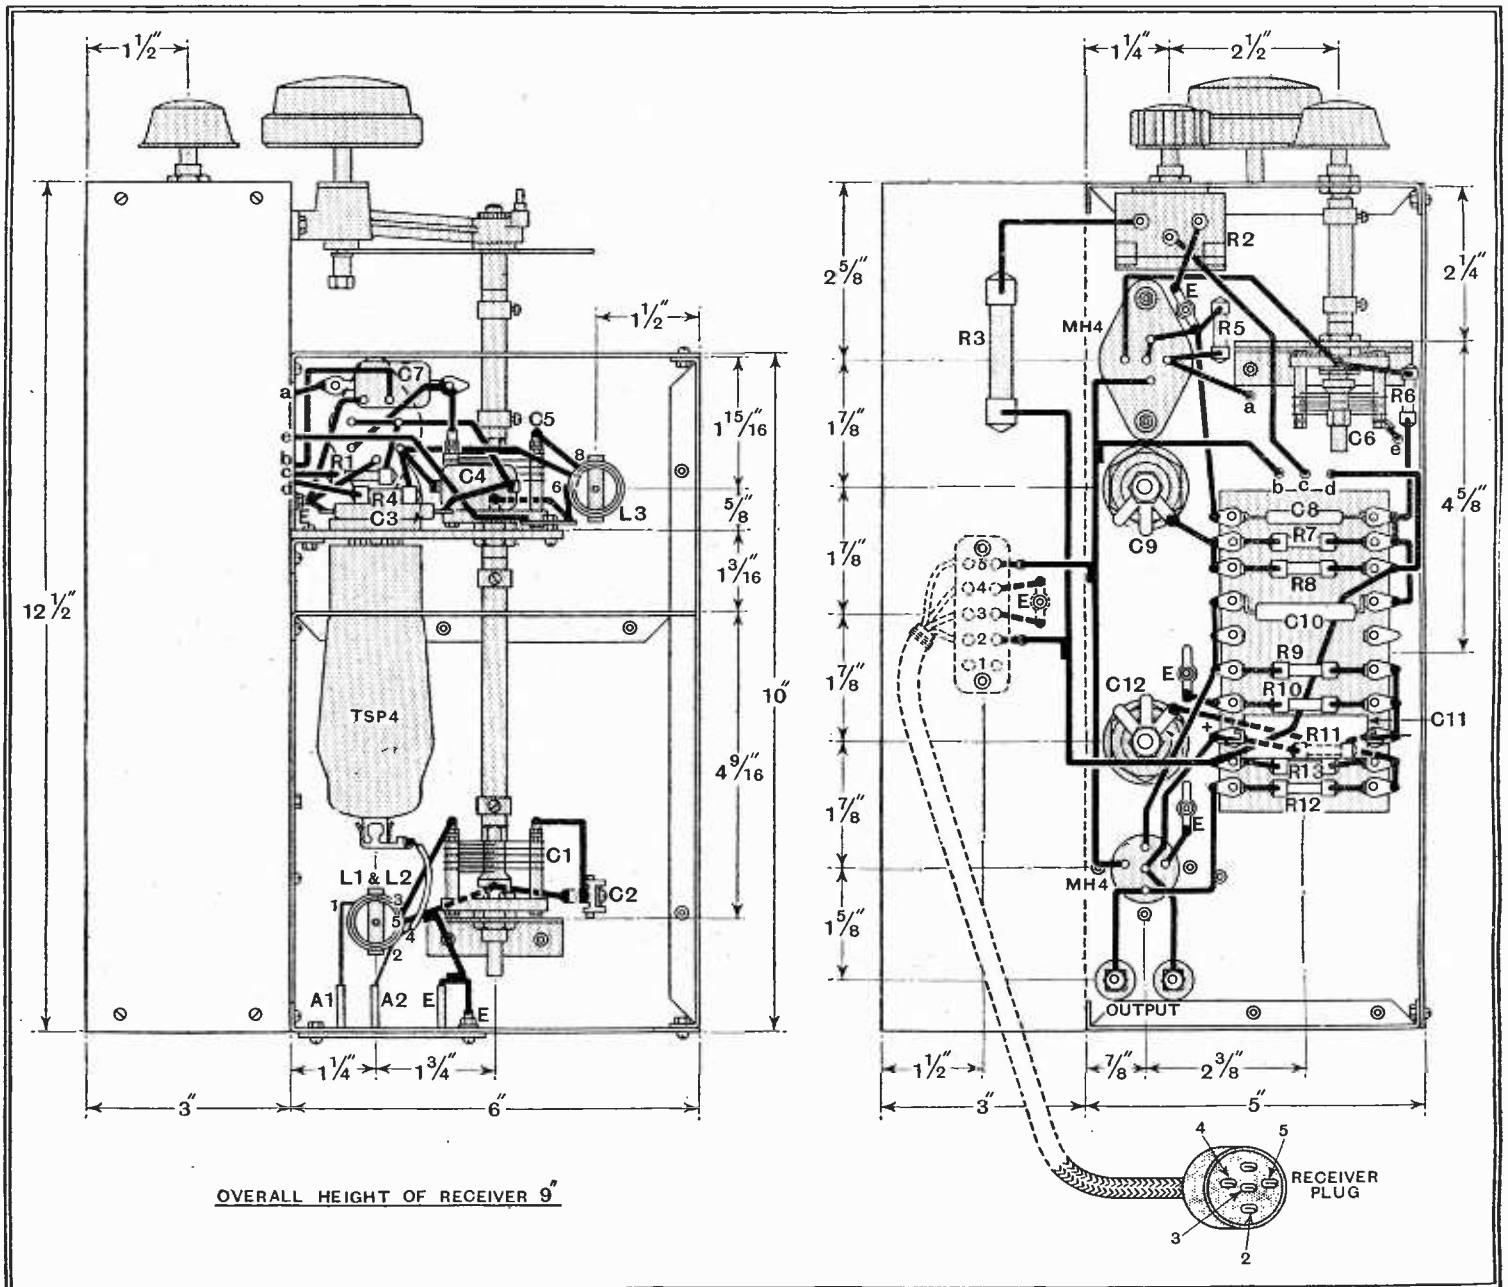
Complete constructional and wiring details are given in these drawings.
